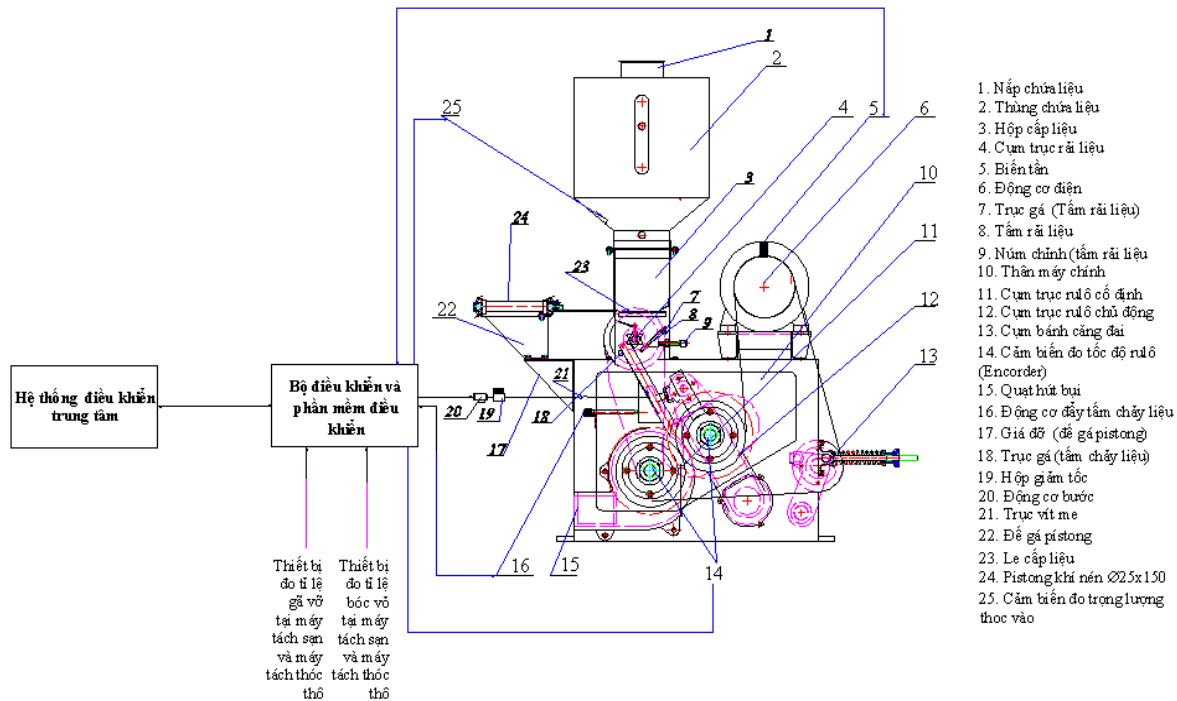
Schematic diagram of the new rubber double-shaft shelling machine.
